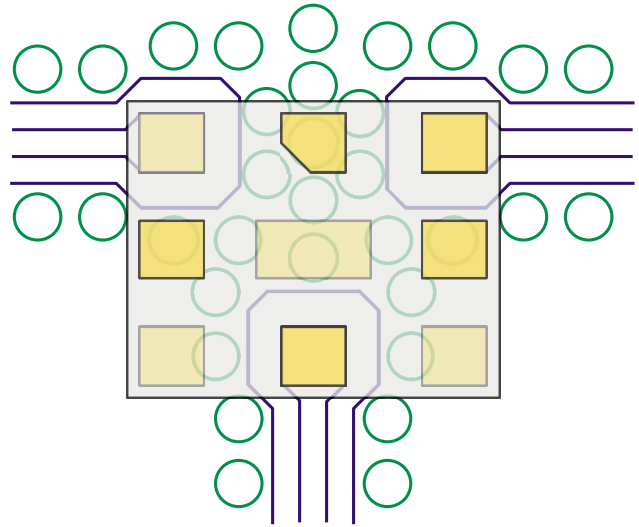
ACMD-6125 Superimposed on PCB Pattern
